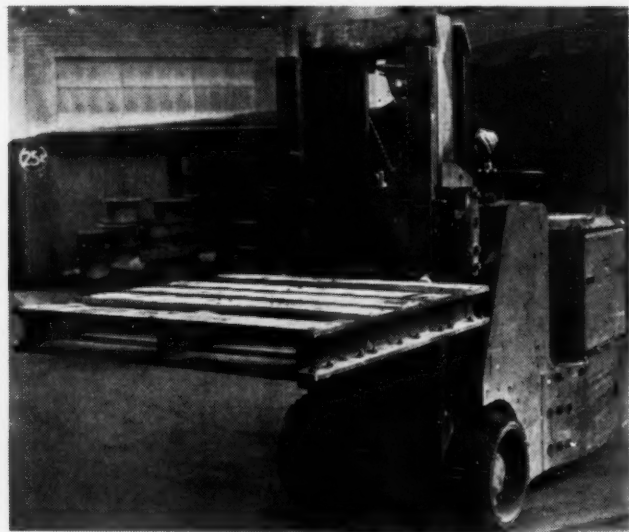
WOOD AND STEEL PALLET USED FOR GENERAL PLANT WORK
